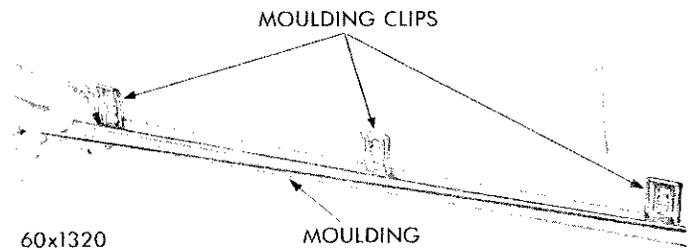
Removing or Installing Lower Rocker Panel Moulding (DeSoto)
